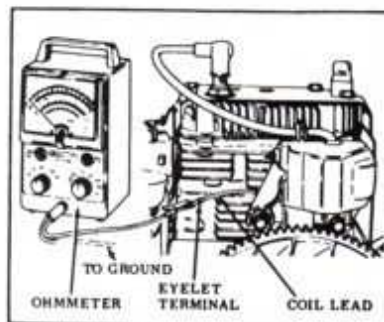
View showing an ohmmeter connected for resistance test of ignition generator coil.
